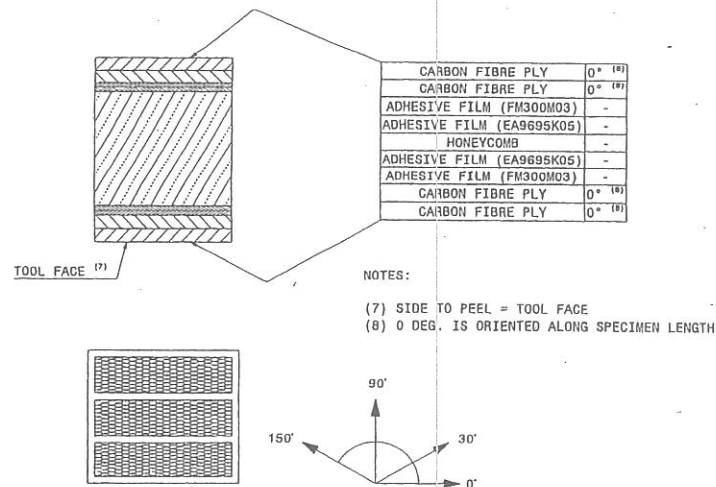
CLIMBING DRUM PEEL TEST SPECIMEN DEFINITION
